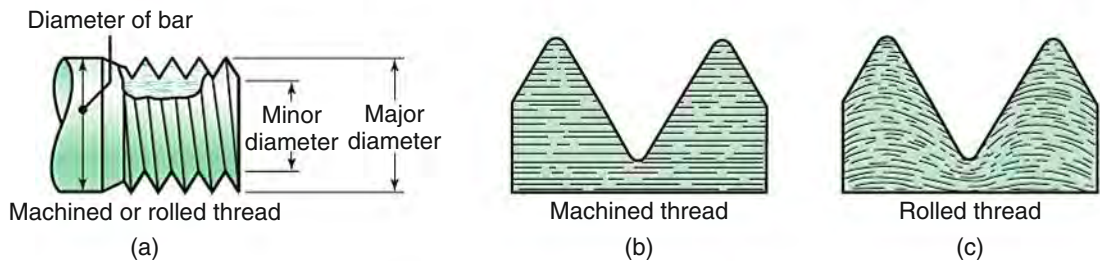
(a) Features of a machined or rolled thread. Grain flow in (b) machined and (c) rolled threads. Unlike machining, which cuts through the grains of the metal, the rolling of threads imparts improved strength because of cold working and favorable grain flow.
